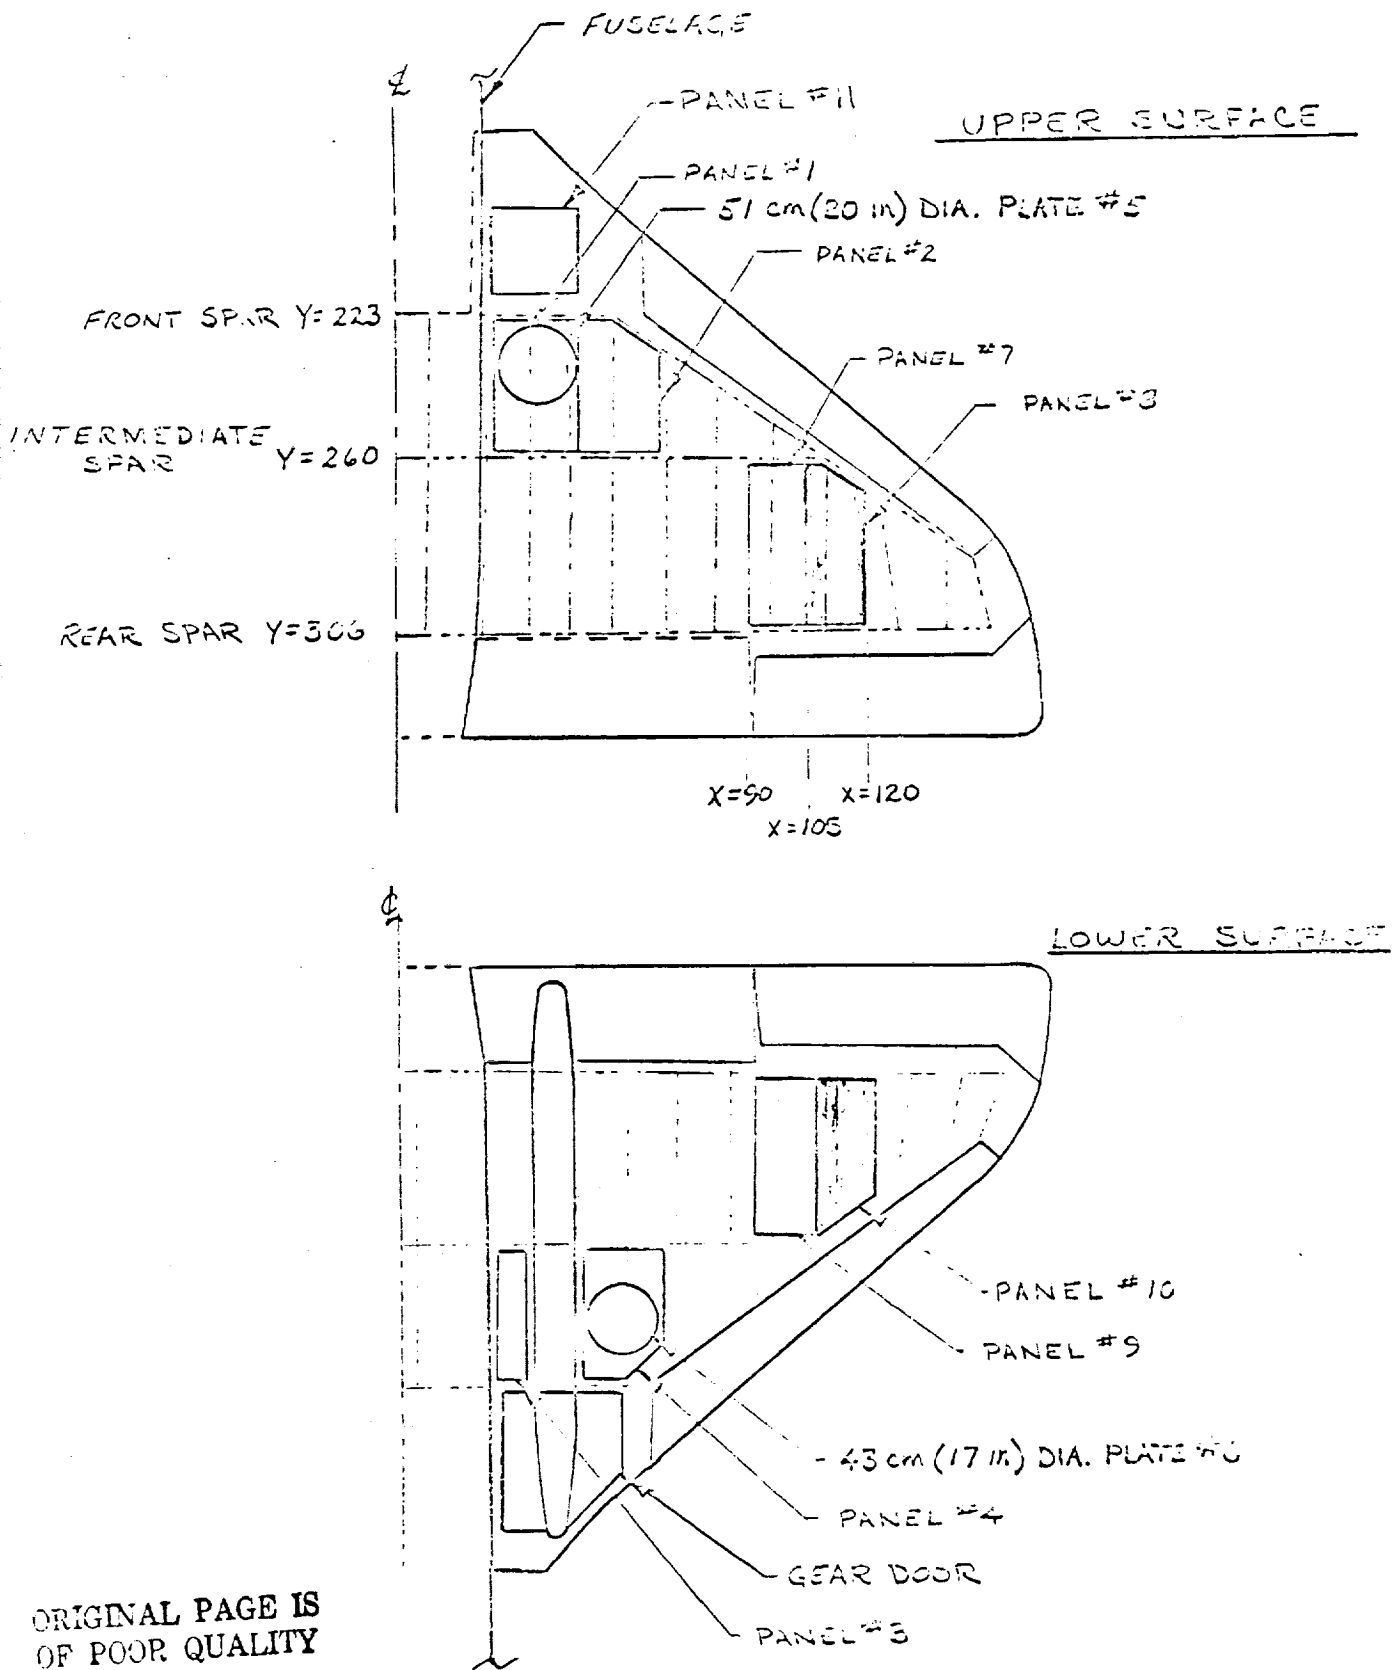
HOLE CONFIGURATION #9. PANELS 8&10 REMOVED.
